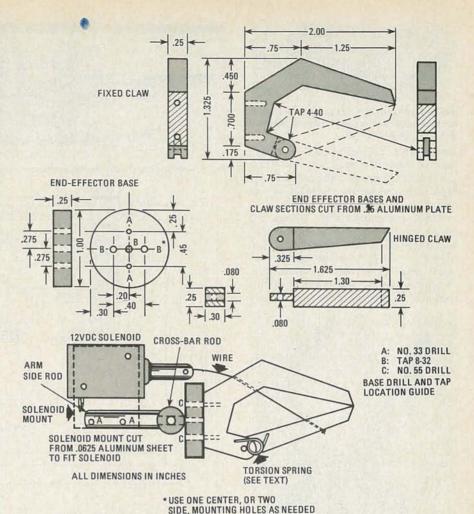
CLAW-TYPE end-effector assembly drawing. This is a heavier-duty mechanism than the finger-type and you may want one of each.
